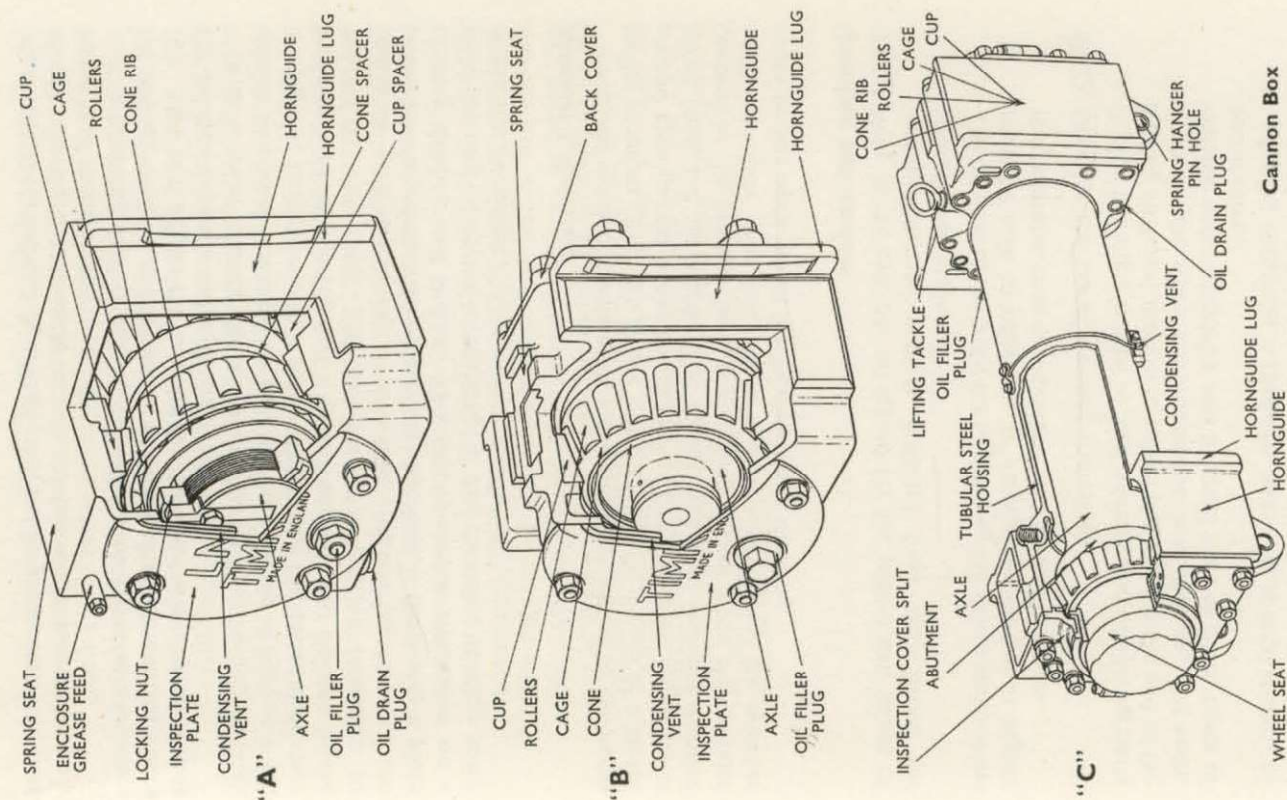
TYPES OF ROLLER-BEARING AXLEBOXES
